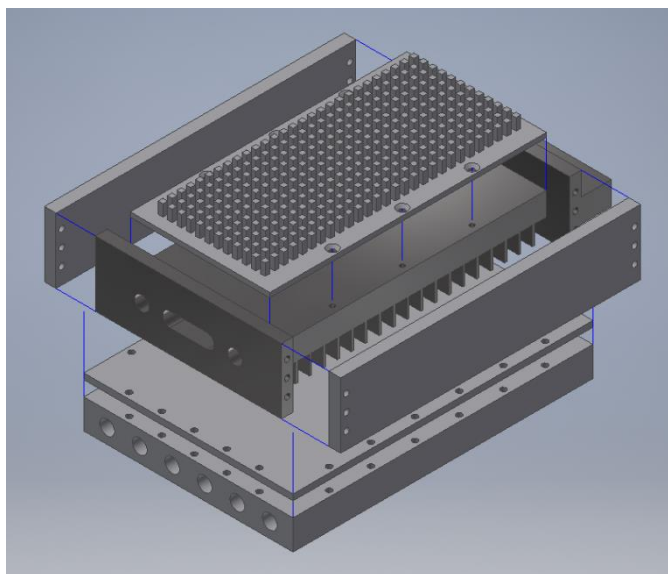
Exploded drawing of the modified base module including a test plate geometry as well as side and heater plates.
